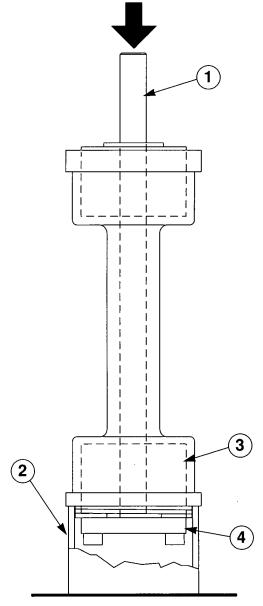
Press bearing block out of spindle. (1) Spindle Shaft, (2) Support Tube, (3) Bearing Block, (4) Pusher Block.
